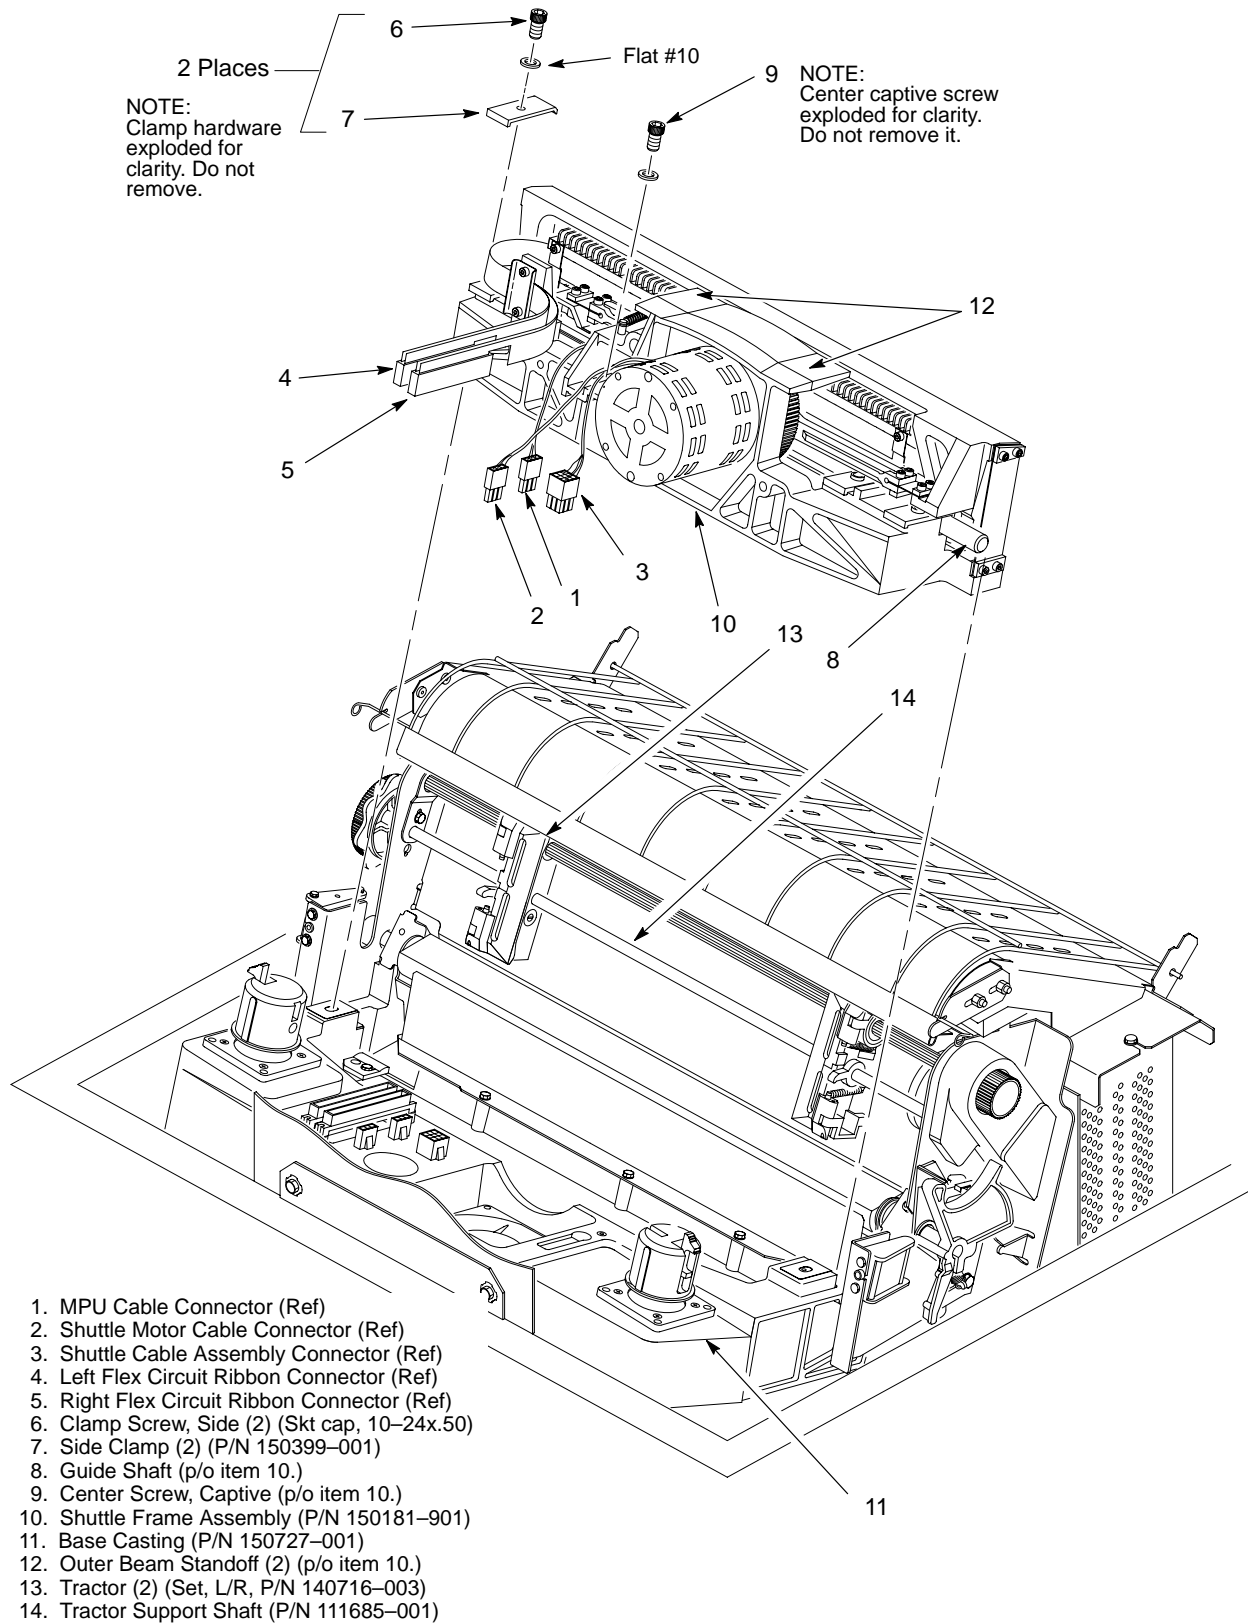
Shuttle Frame Assembly Removal/Installation
